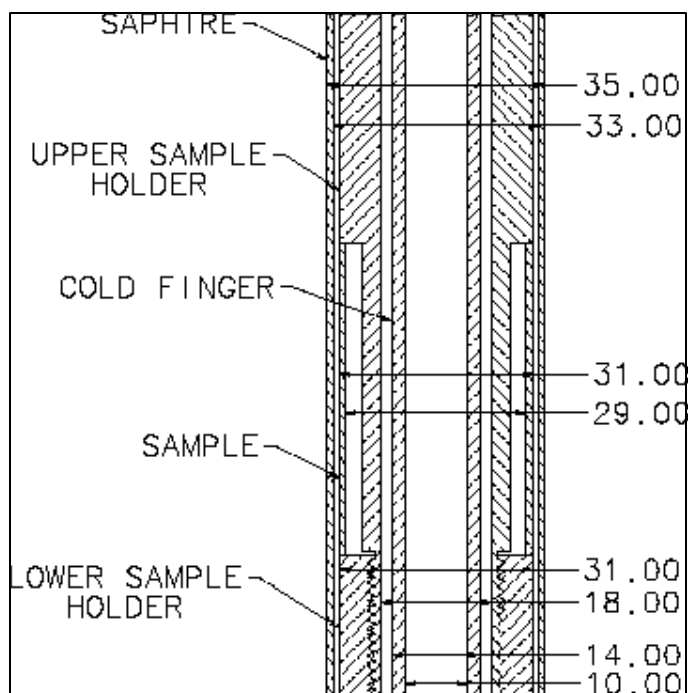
Host cavity assembly including sapphire bore, sample-holder, adaptor flanges, cryostat top and bottom flanges and input/output couplers. Zoom into middle section (all measures in mm).
